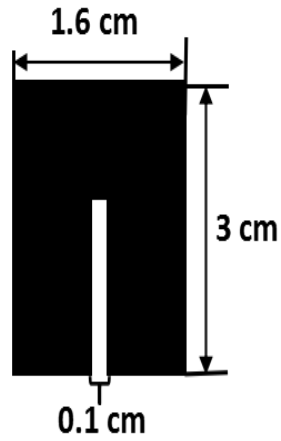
Dimensions of one CNT-MC/BOPP actuator in the intelligent gripper.
